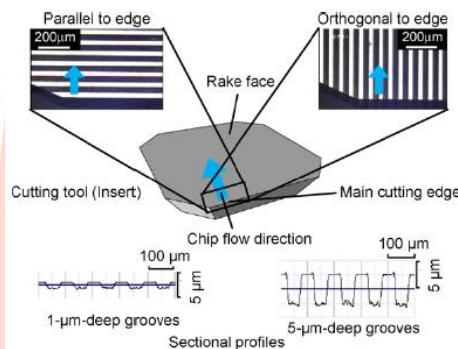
Newly developed cutting tool with periodical stripe grooved surface.[13]
